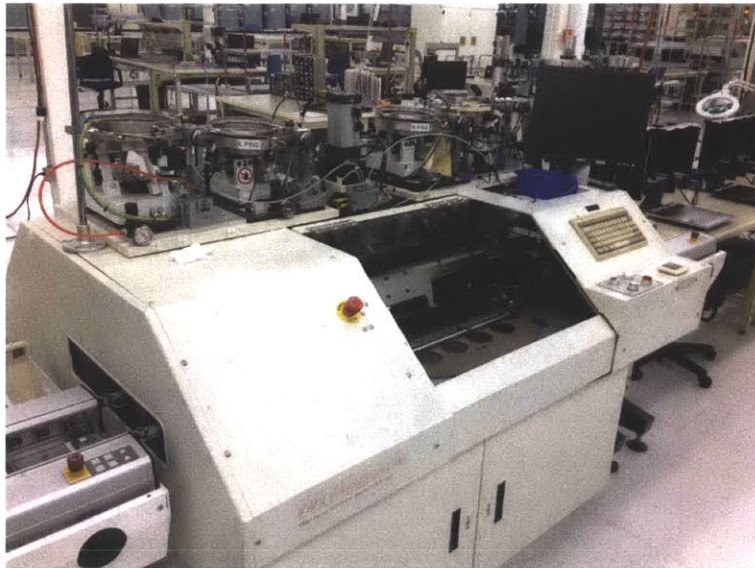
The vibratory bowls of this pinning system can be seen atop the machine enclosure. These bowl feeders send pins to the insertion head inside of the machine.
